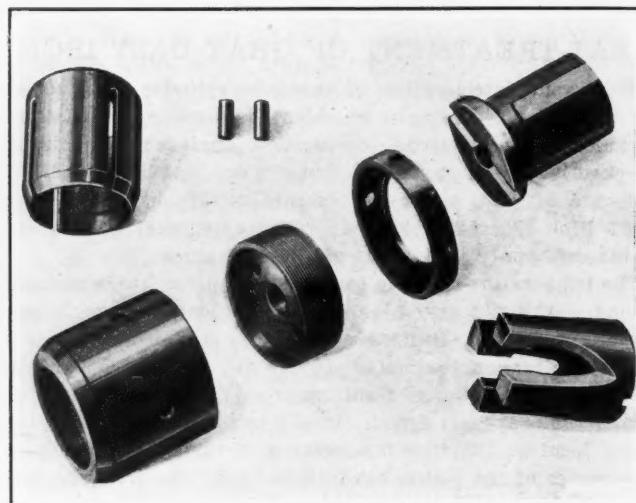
Spring Screw Threading Die-holder shown in Fig. 34, dismantled to show Construction
